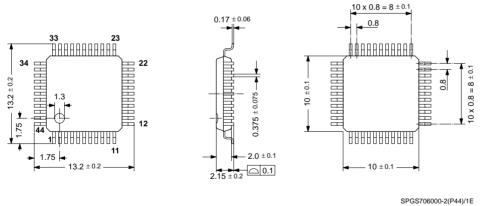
44-Pin Plastic Quad Flat Package (PMQFP44) Weight approximately 0.4 g Dimensions in mm
